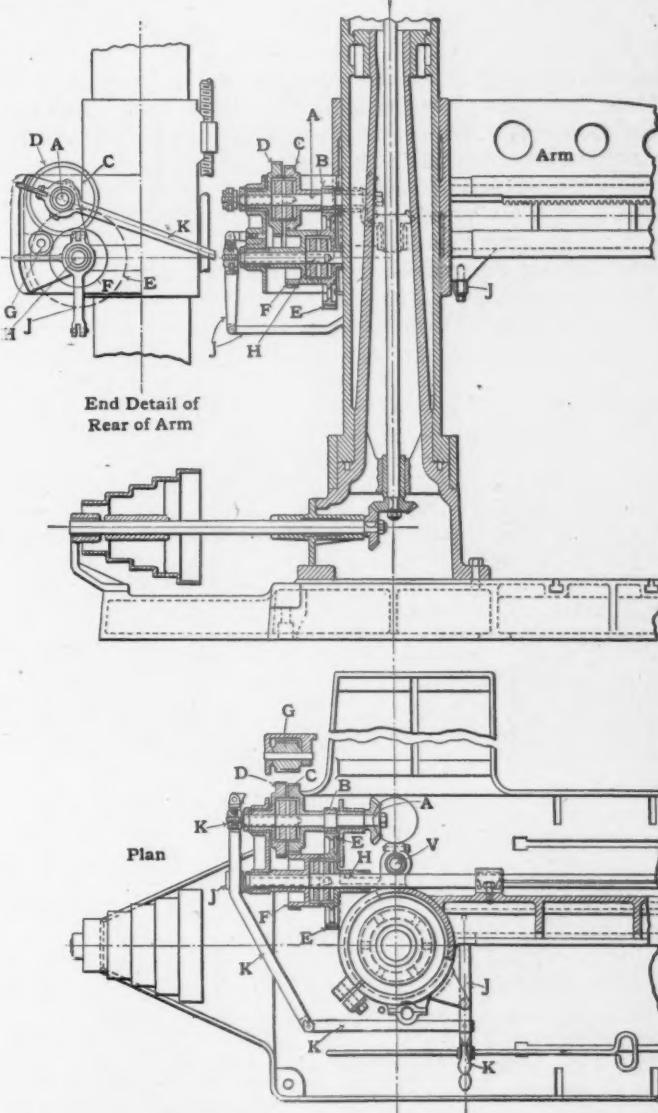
DETAILS OF THE CHANGE-GEAR MECHANISM UPON THE REAR END OF THE ARM OF THE DRILL FOR OBTAINING ADDITIONAL SPEEDS AT THE SPINDLE.
